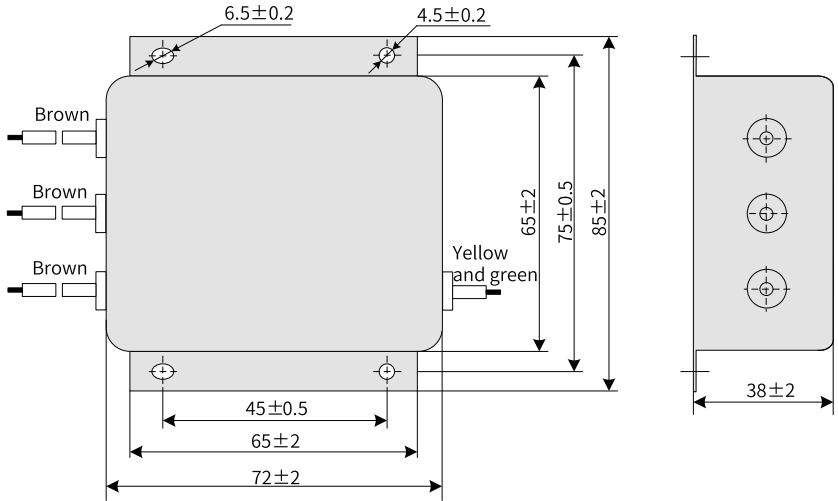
Outline dimensions of the simple filter (unit: mm)
